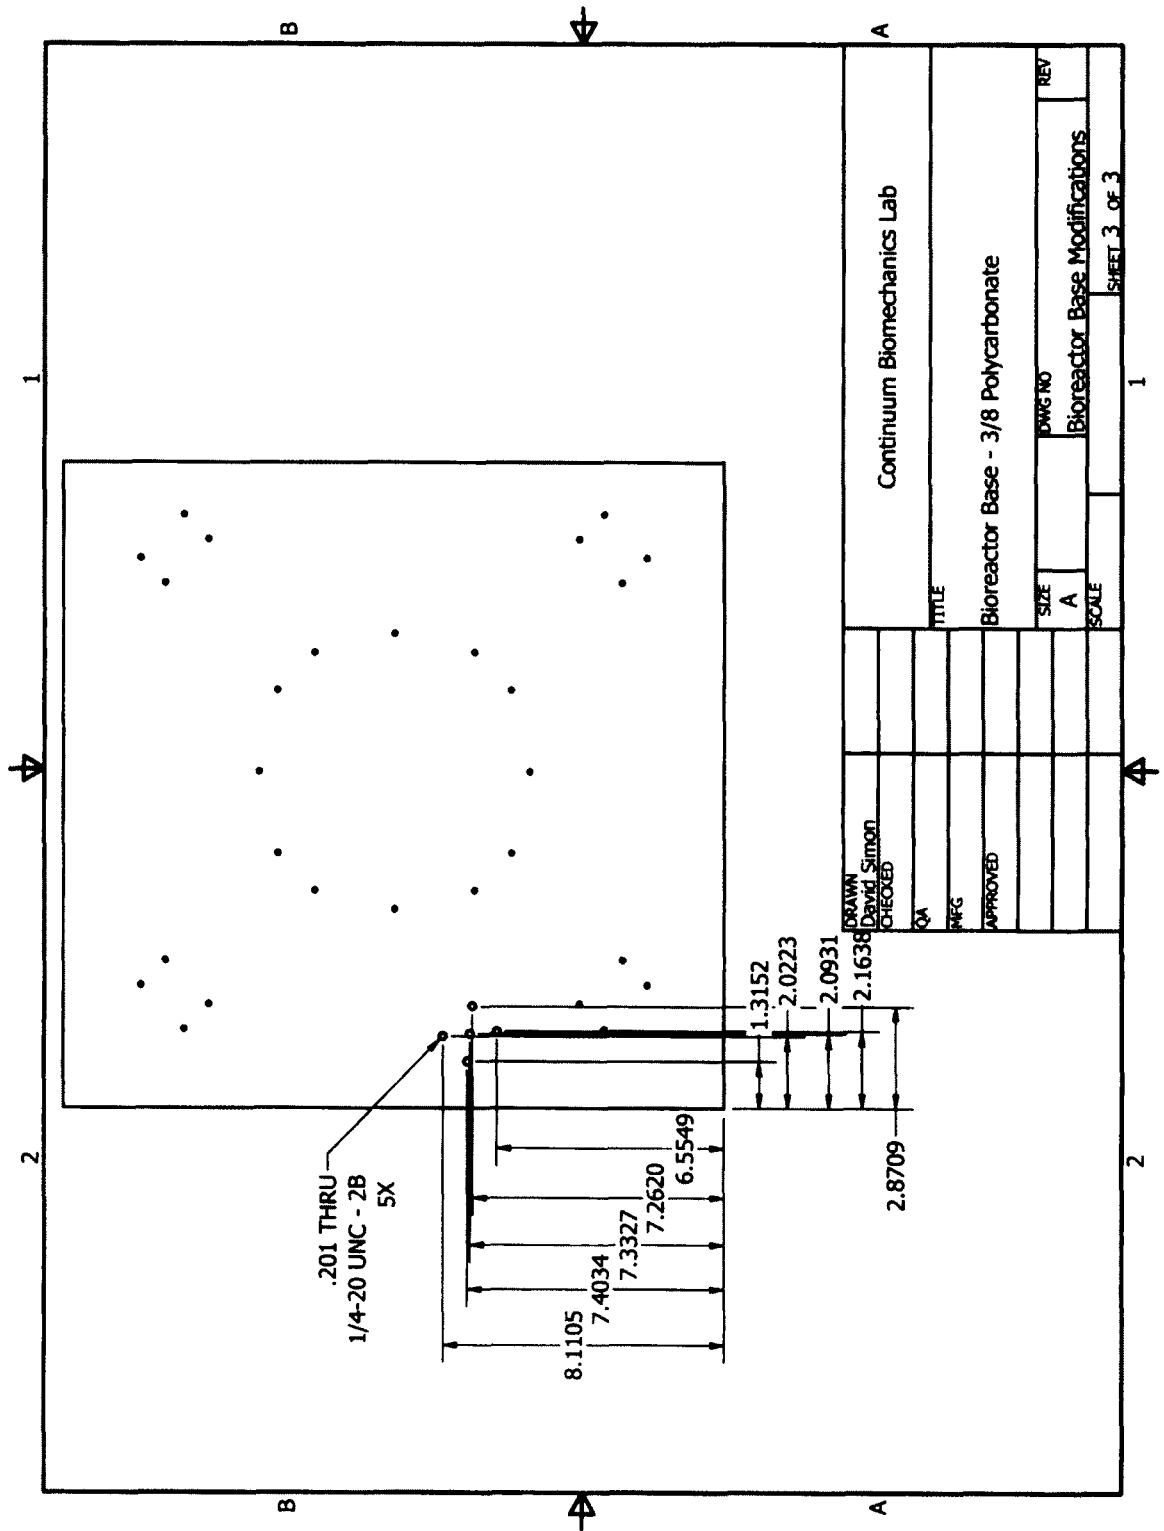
System baseplate technical drawing #3. Provides locations of tappings for camera support base. Units are in inches.
